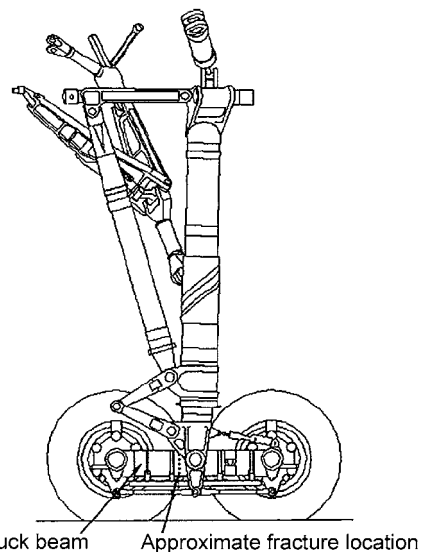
Schematic of the assembly of a Boeing 757 main landing gear showing the location of fracture
